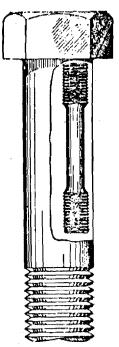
Location of Standard Round 2-in. Gage Length Tension Test Specimen When Turned from Large Size Bolt.
